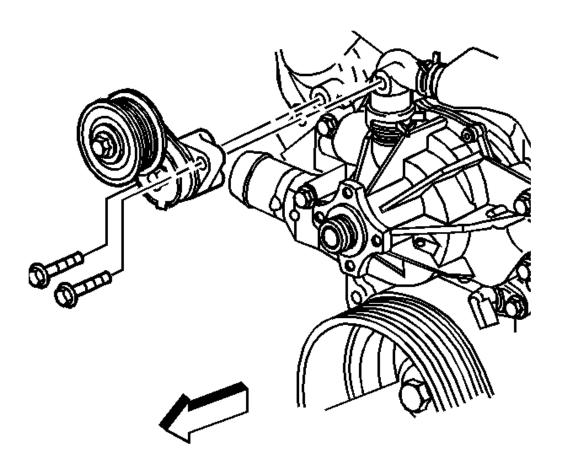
View Of Drive Belt Tensioner & Bolts Courtesy of GENERAL MOTORS CORP.
